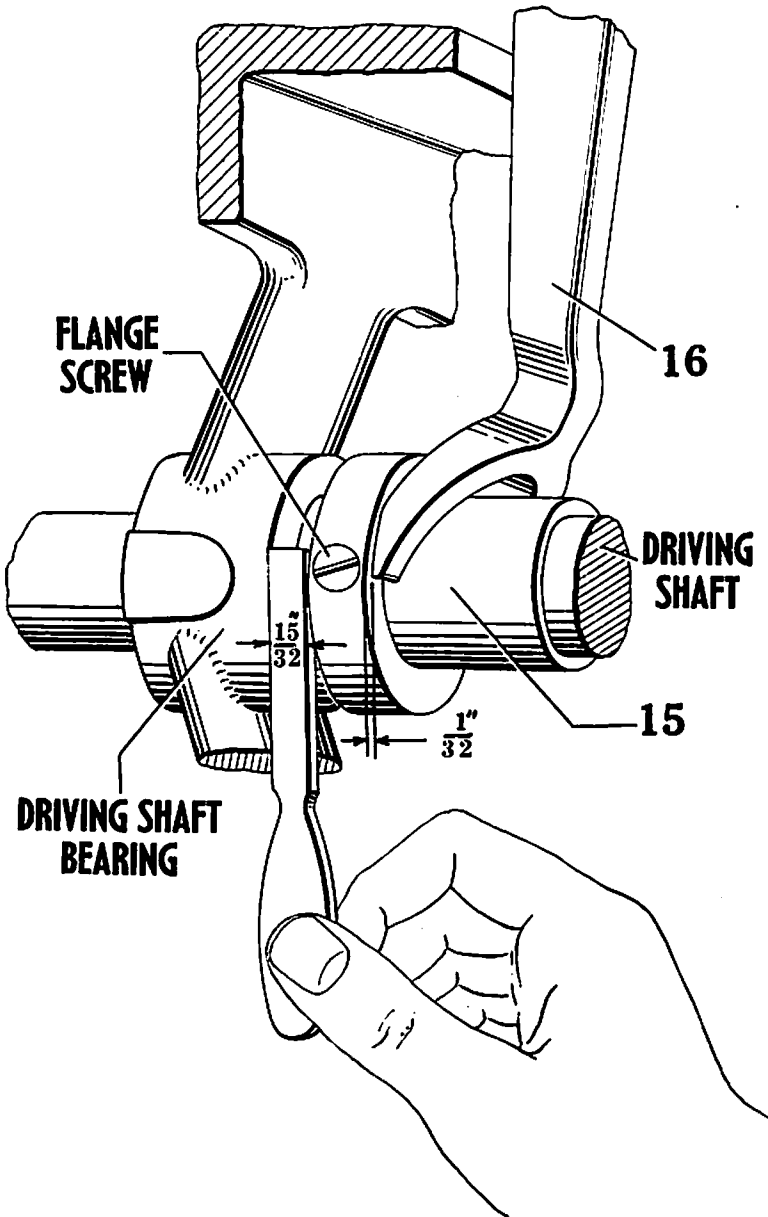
Clutch Flange Clearances. Both of the clearances illustrated are obtained *when the driving shaft friction buffers are engaged with the driving gear pulley*. The motor should be shut off, of course, when measuring the clearances. The $\frac{15}{32}$ " space between the driving shaft bearing and flange 15 depends upon the thickness of the friction shoe buffers. If the leathers are worn, it will be necessary to apply new ones to restore the original setting. The $\frac{1}{32}$ " play between the forked lever 16 and flange 15 is obtained by adjusting screw 19, Fig. 182.
